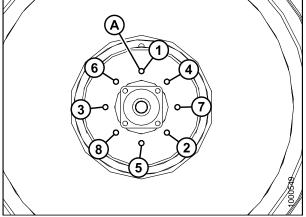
Forked Caster Wheel Nut Tightening Sequence
